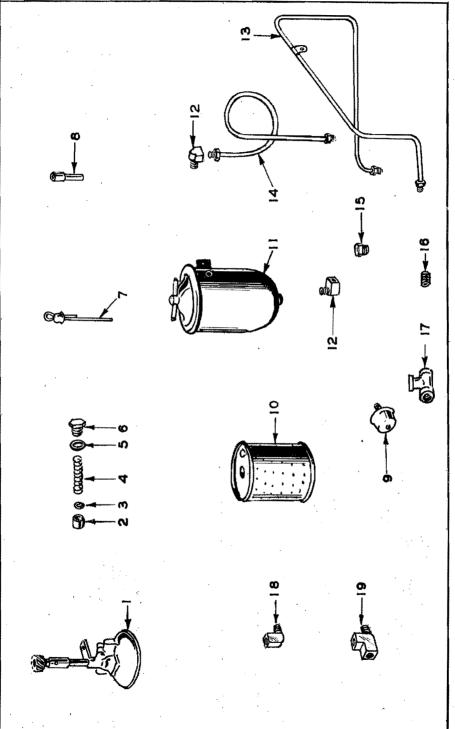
OIL PUMP AND OIL FILTER GROUP
